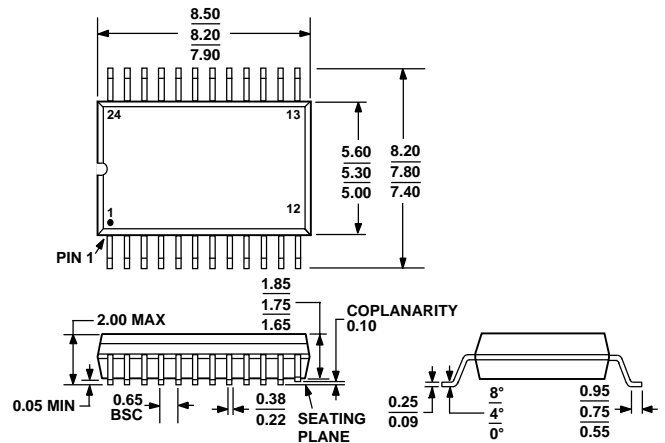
24-Lead Shrink Small Outline Package (SSOP)
